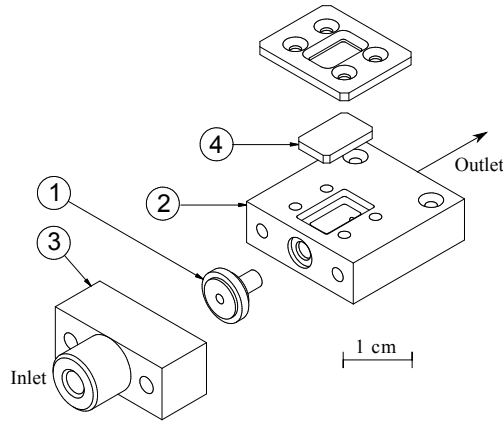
Schematic drawing of the milli channel assembly. A holder with the constriction is machined in PMMA or PEEK (1). The rest of the assembly is manufactured in PEEK. The holder is inserted into the chamber (2), and fixed using a second block (3) which contains the inlet port. The top and bottom of the chamber are made of transparent quartz plates (4) for illumination.
